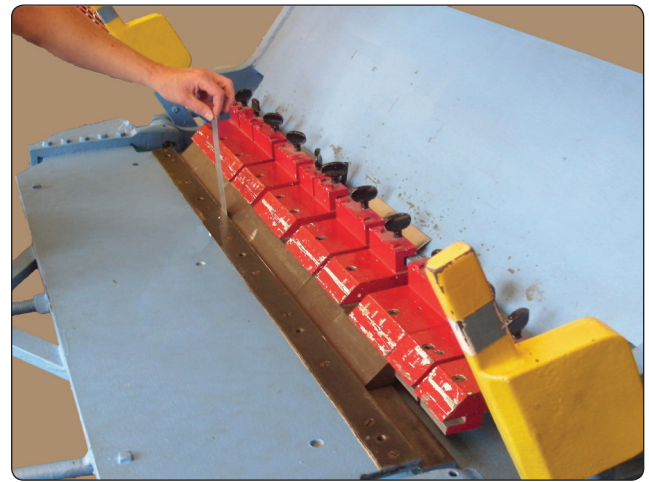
Brake nose gap adjustment with piece of material same thickness as part to be formed.
